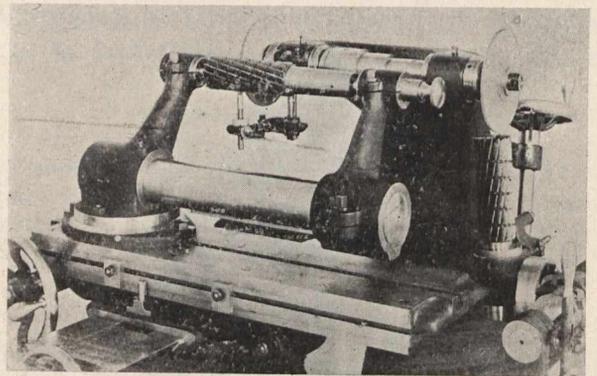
Grinding Side and End of Taper Shank End and Side Mill.
